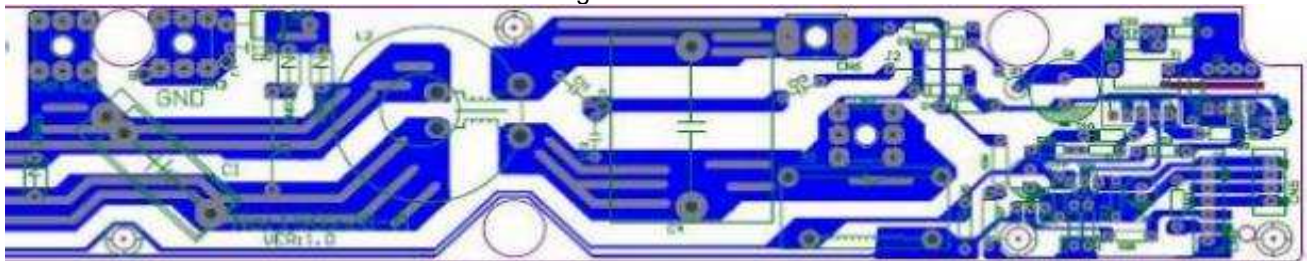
17 - Optional PCB layout of Power PCB for model C74E-BBCC02
